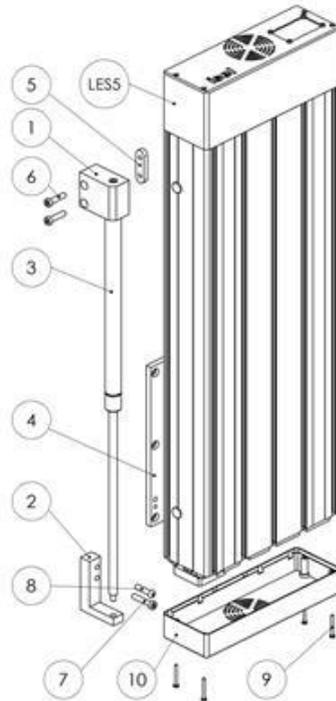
Exploded drawing Assembly of the gas spring mounting kit to a LES 5
